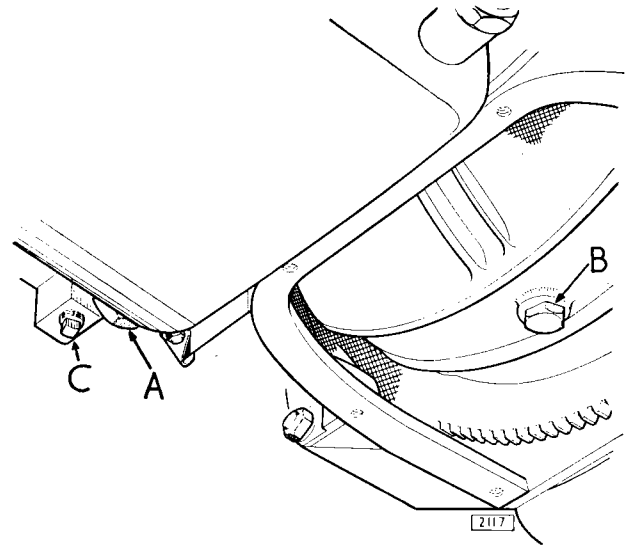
Automatic transmission drain plugs (The converter housing cover plate has been removed)
